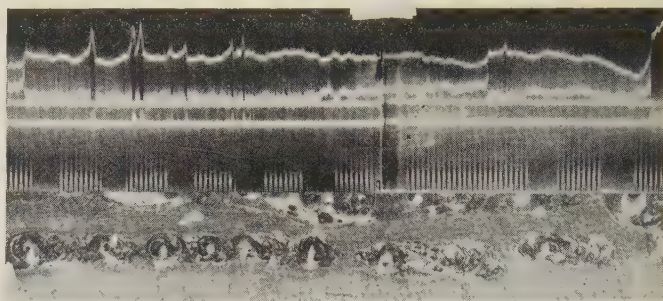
Unsteady welding. 160 amp. 32 volts.
